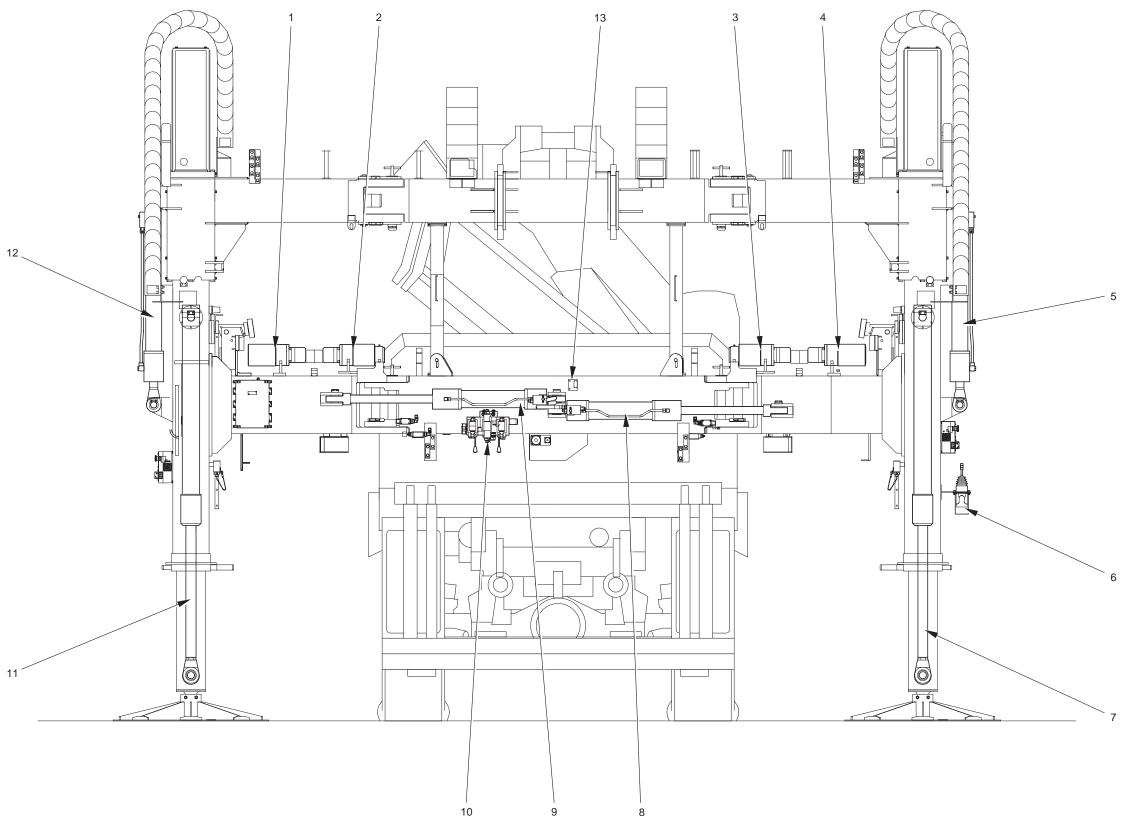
A-FRAME HYDRAULIC ASSEMBLY LOCATIONS
